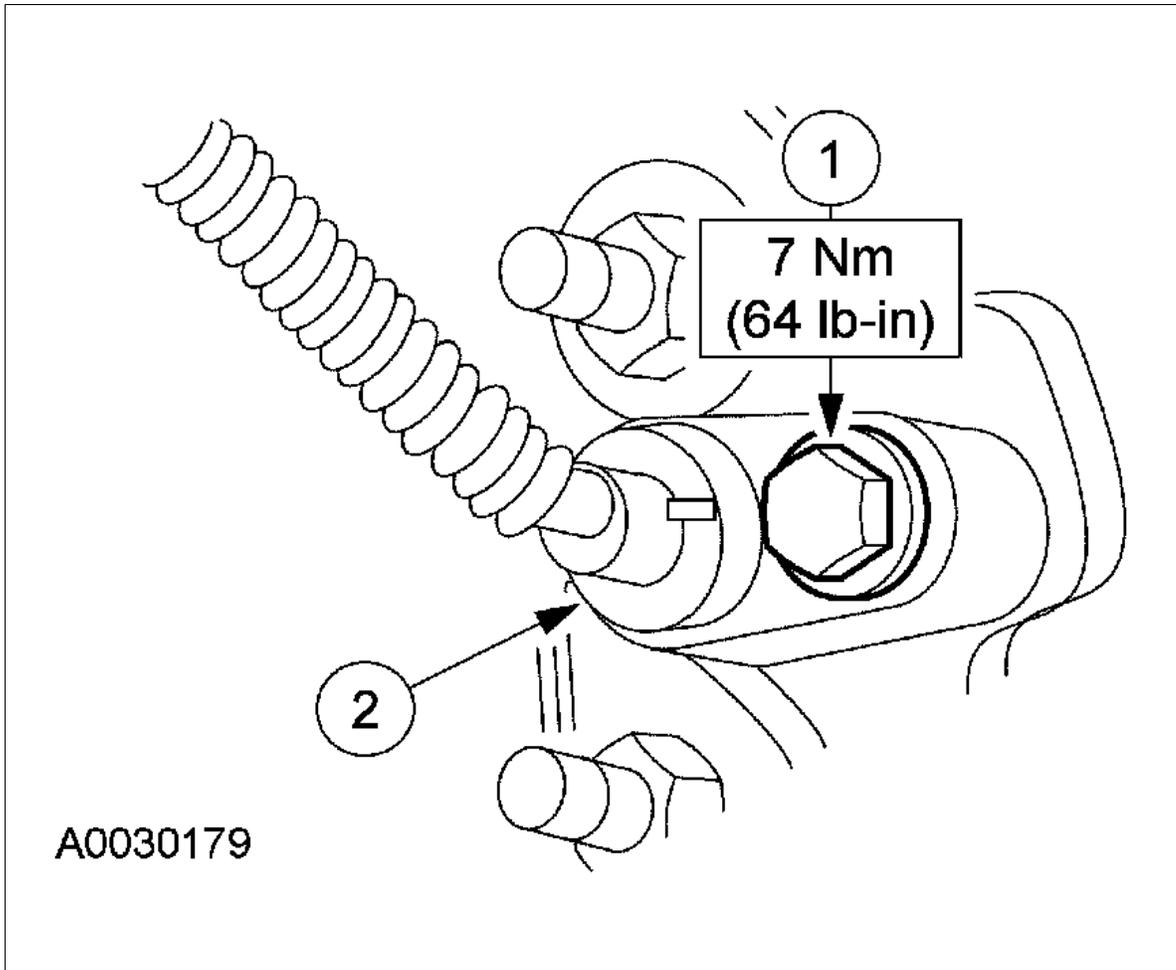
Installing Differential Pinion Shaft Lock Bolt
